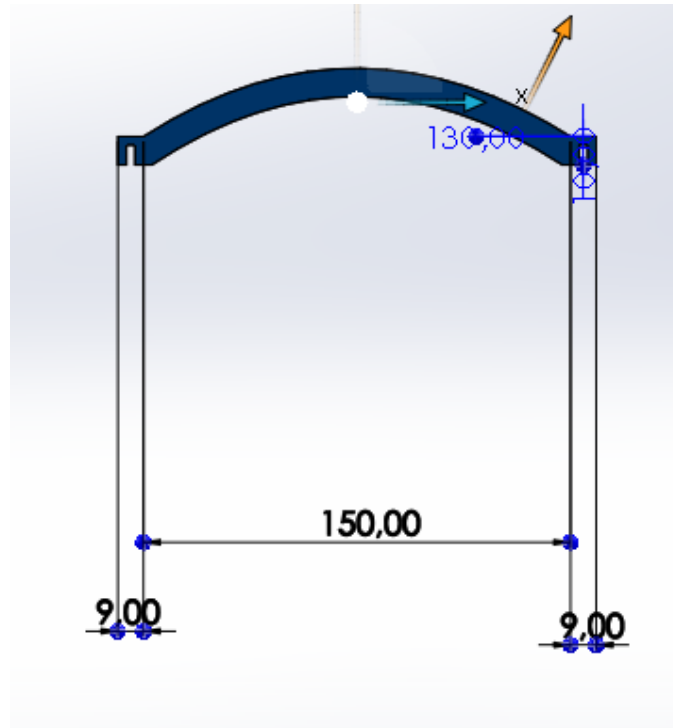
Dimensional Measurements of Front and Rear Parts in SolidWorks
